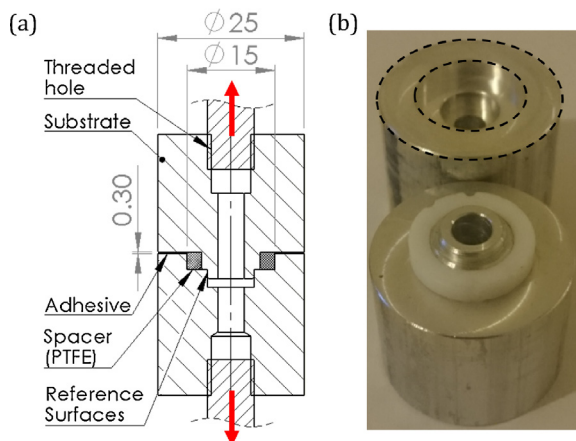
Panel (a) specimen geometry; panel (b) photo of an adherend textured surface: the dashed line identifies the adhesive bond area.
